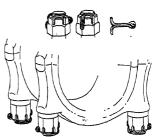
METHOD OF SPLIT PIN NING CONNECTING-ROD BOLTS.
